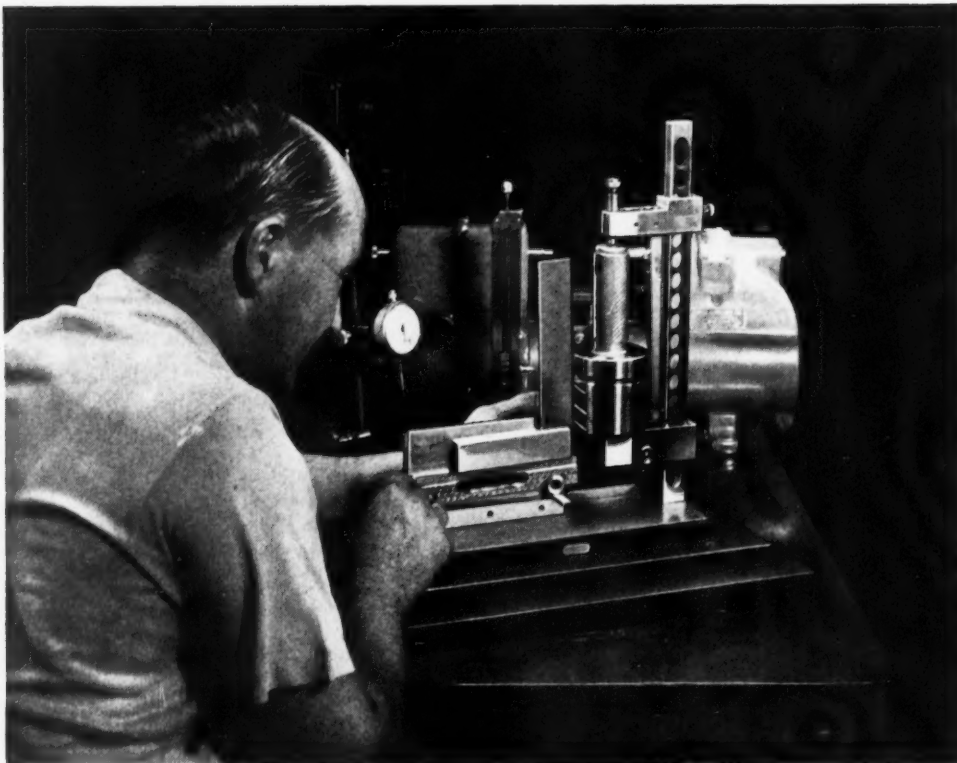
Checking the Taper of a Pipe-thread Gage by the Use of a Sine Bar and a Steel Square
